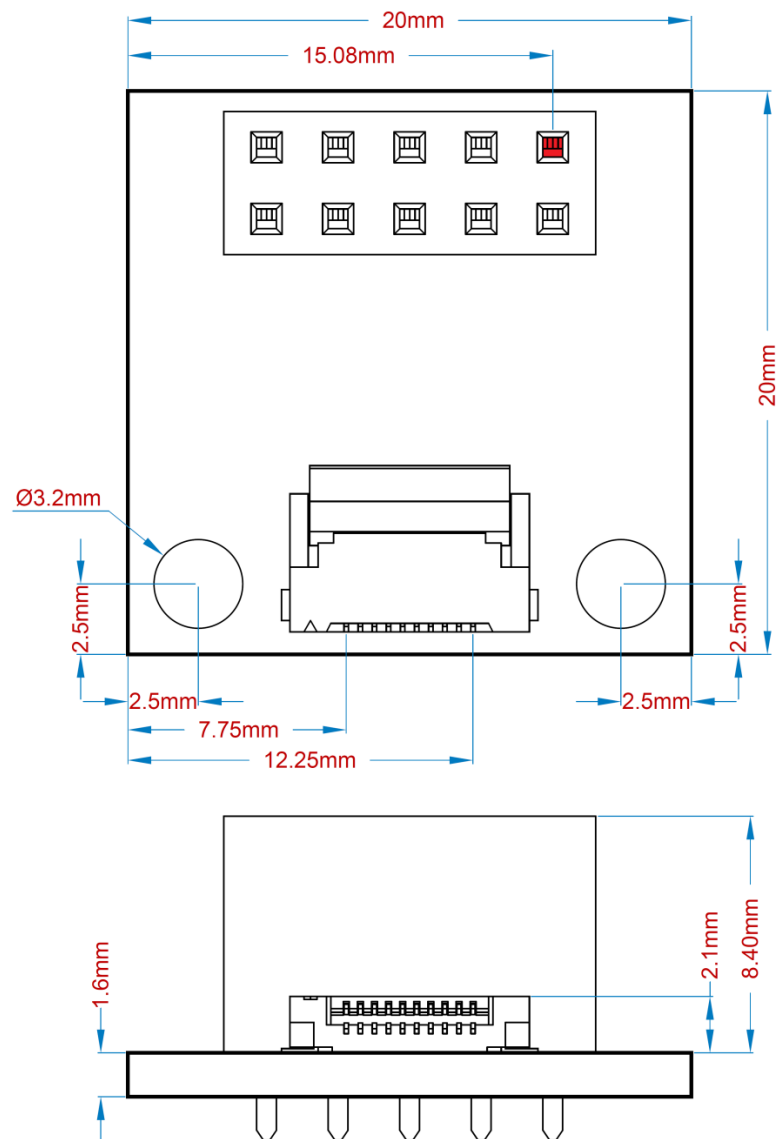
Capacitive Touch Adapter Dimensions – Top Side
